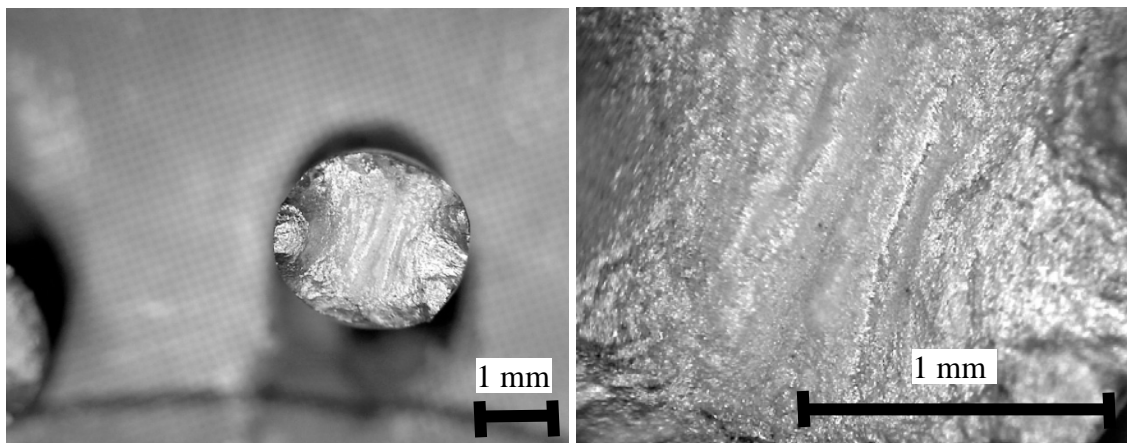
Fatigue fracture of aluminum alloy containing 5% magnesium for  $\sigma = 1564.9$  MPa
